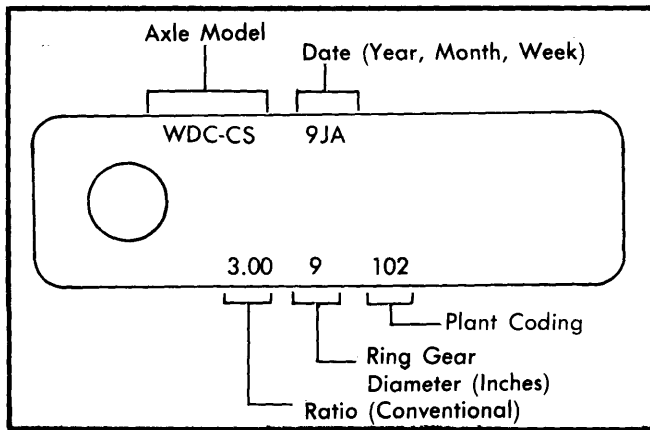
Ford Motor Co. Rear Axle Identification Tag
